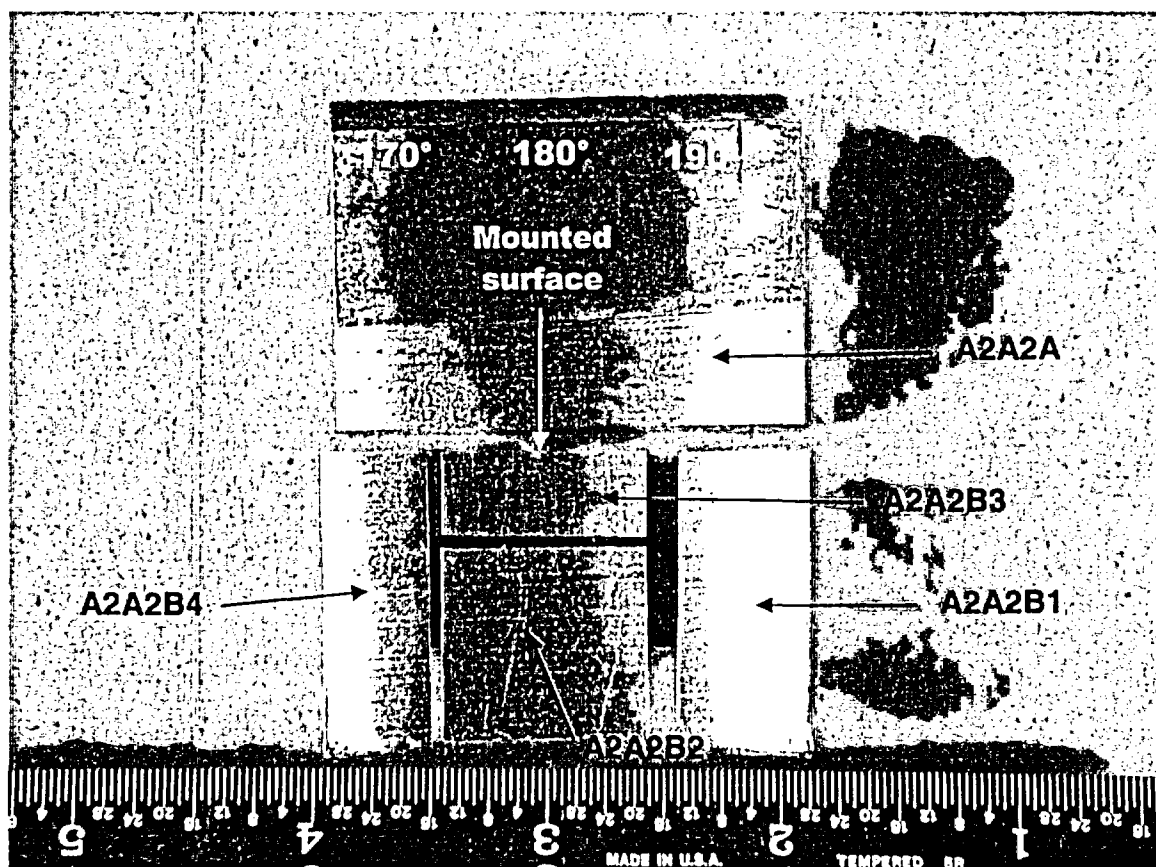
Sectioning of Piece A2A2, looking at the ID of the J-groove weld bore.
